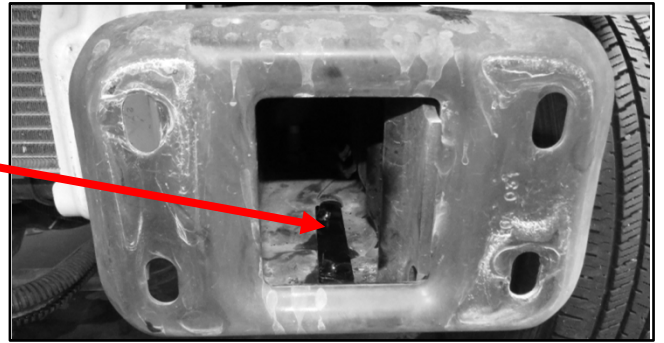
Drill holes to enlarge them to about 10mm diameter
